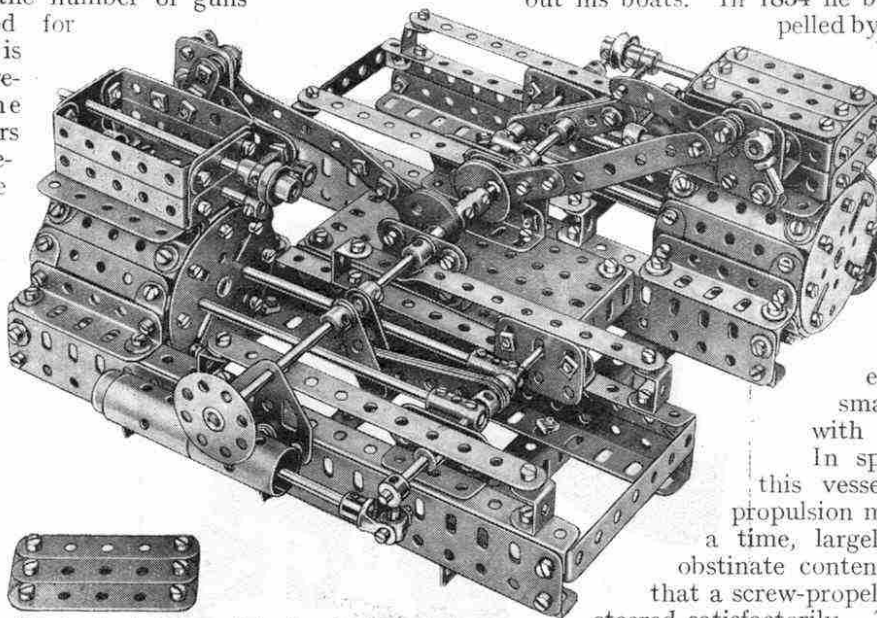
A return connecting rod engine, one of the earliest high-speed screw engines.
